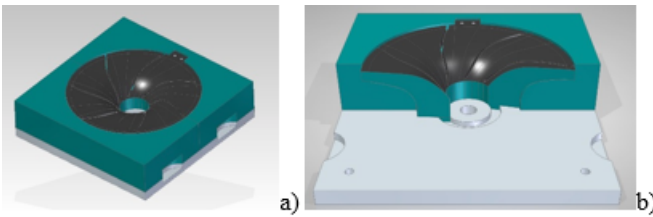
a) CAD of block-mold; b) Section of the 1:1 Scale mold placed on the aluminum support plate
